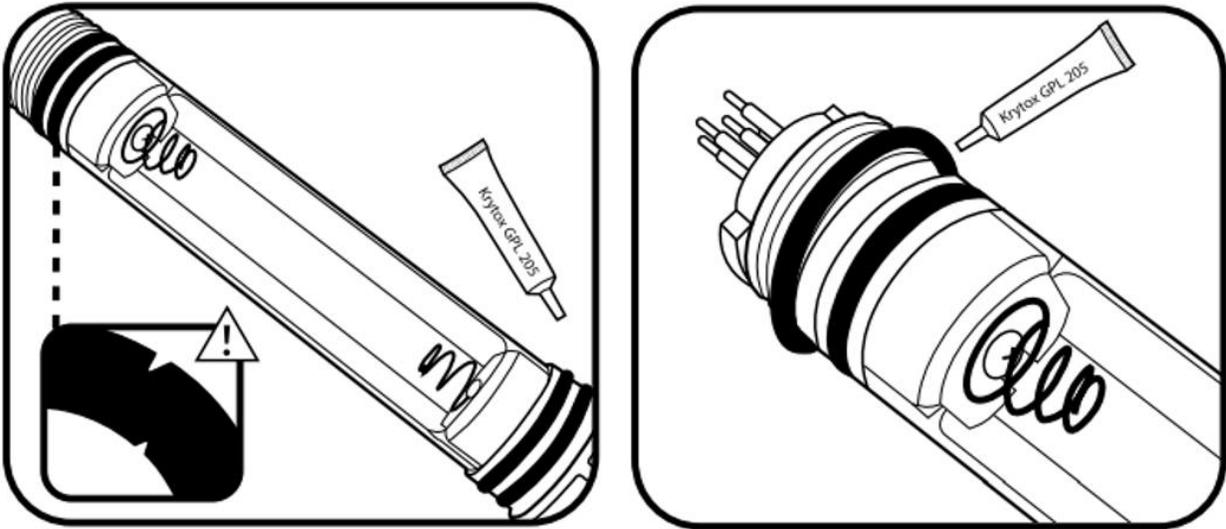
Remove damaged o-rings and replace with lightly greased new o-rings [Source: [ER \[02\]](#)]
